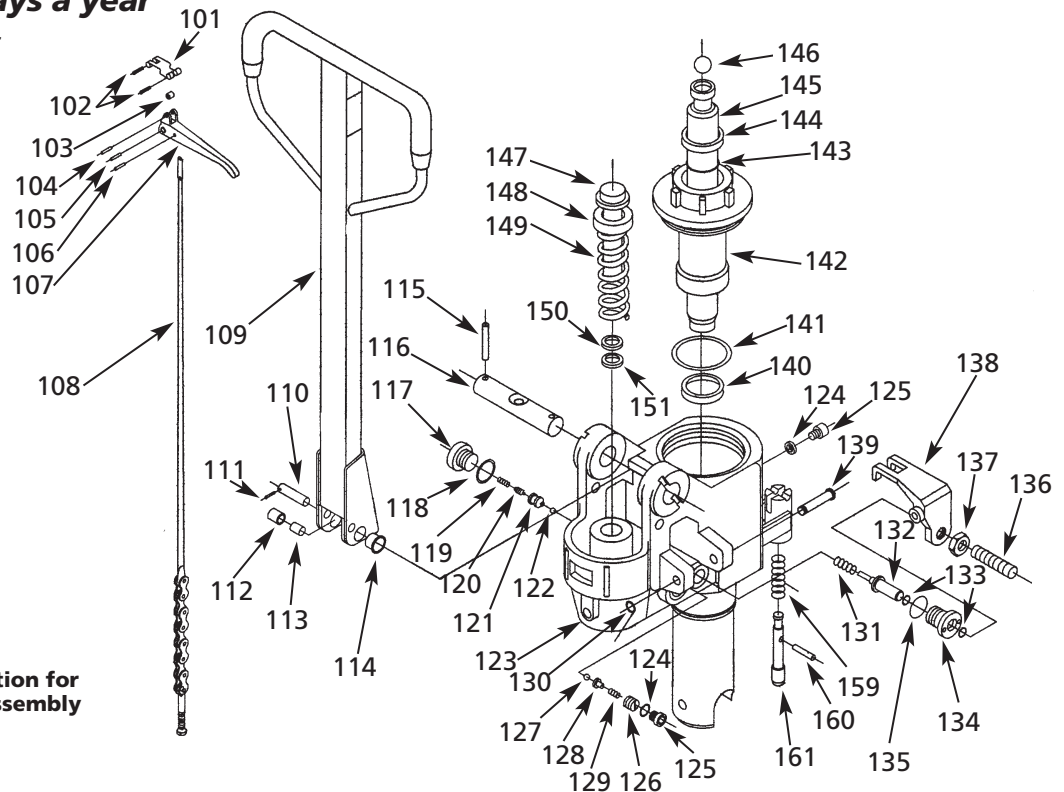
Repair Parts Illustration for Handle and Hydraulic Pump Assembly
